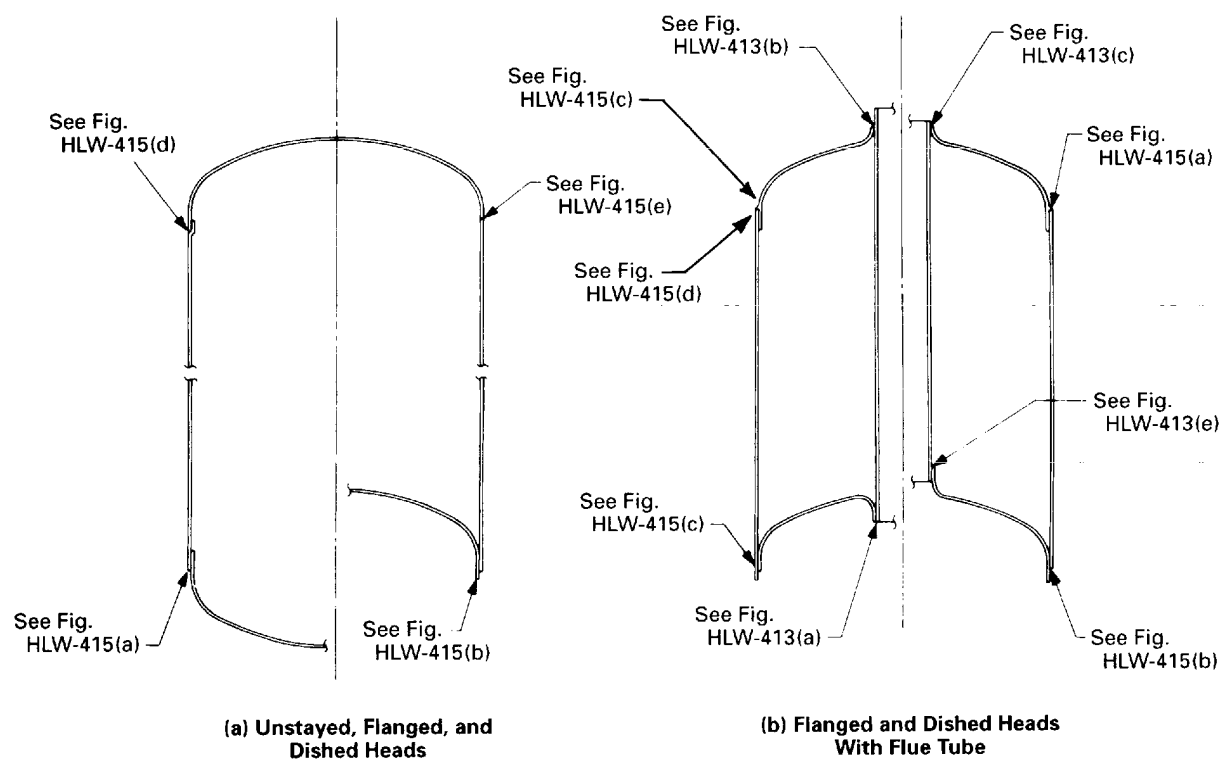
TYPICAL WATER HEATER WELDED JOINTS
